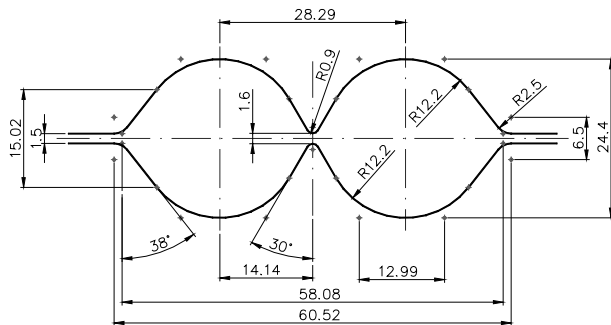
Shape and dimension of the slitting shape (\varnothing 16 mm round ribbed rods rolling)
